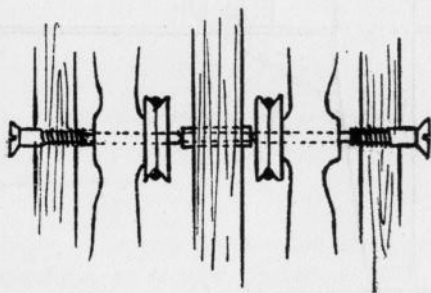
Arrangement of tandem screws. The screw and its pulley are made fast on a small shaft which runs between pivots, one of which is adjustable.
